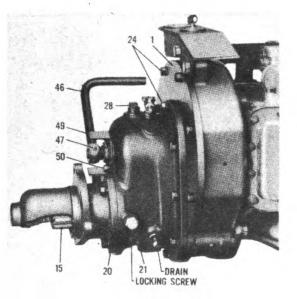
CARBURETOR SIDE OF STARTING UNIT
